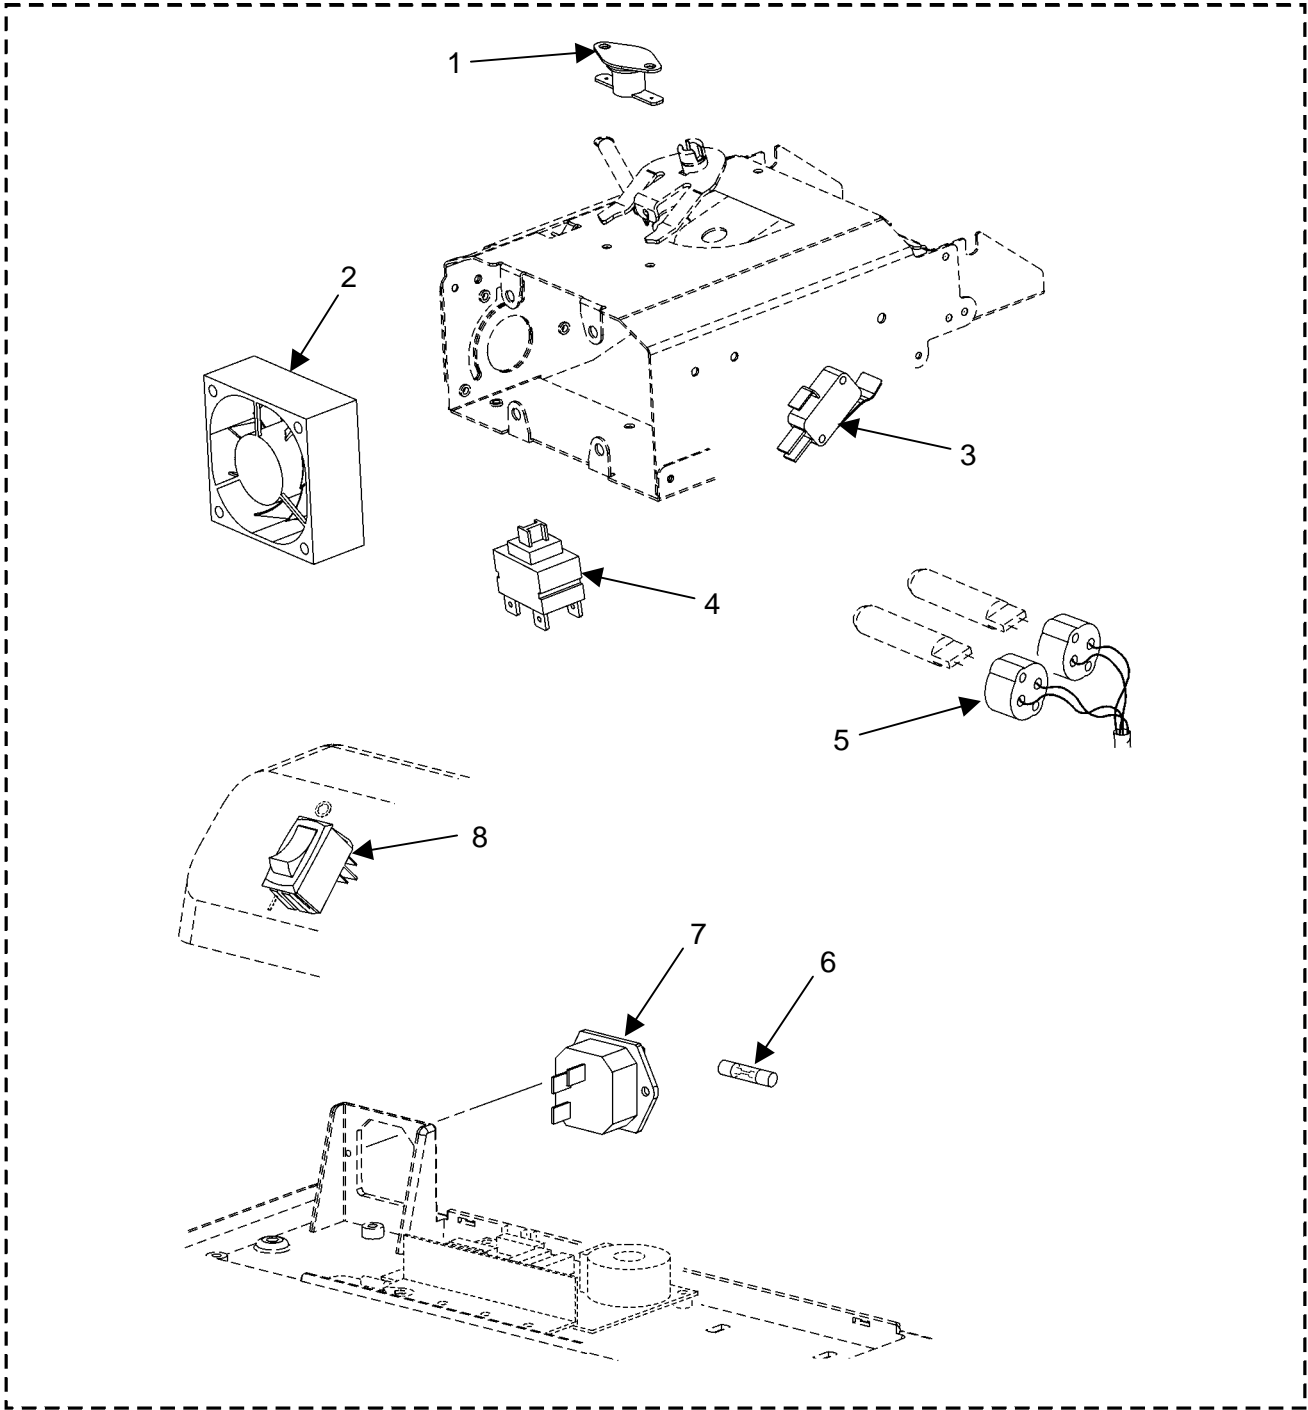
Small Electrical Parts Kit (220-250V Machines)
